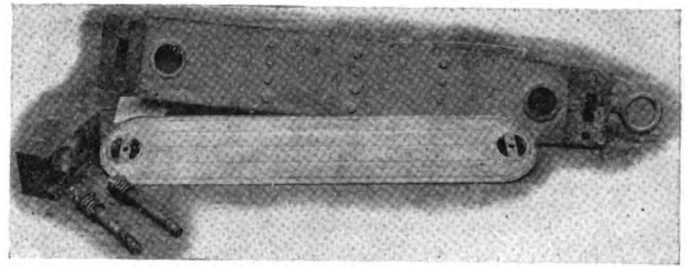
Three-ton radiator details. Section of core, header, side member, hold-down bolts and block
